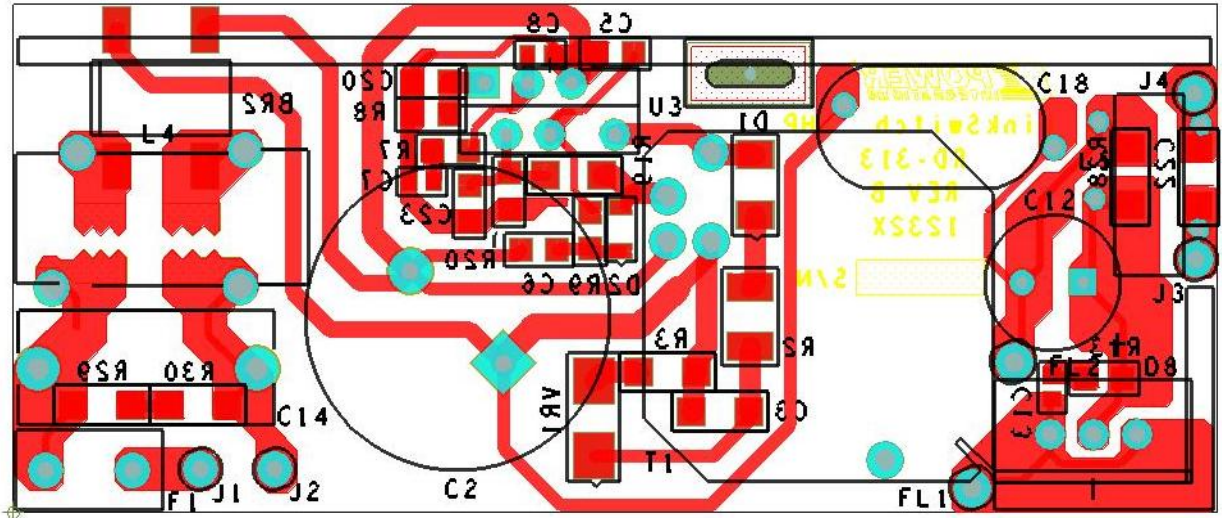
PCB Top/Bottom Side 2.76" (70.1 mm) x 1.16" (29.4 mm).
